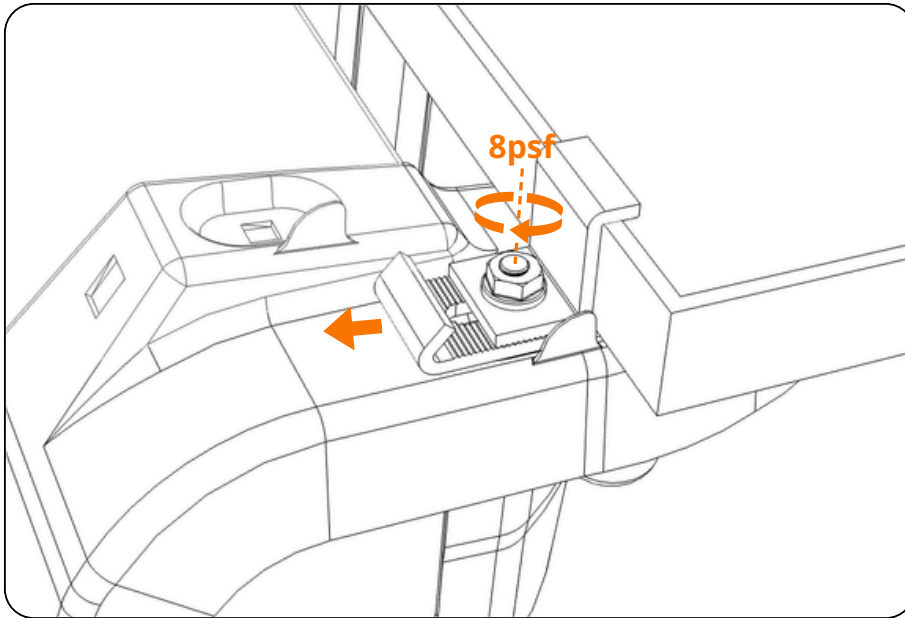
Clamp Attachment (Pictured on 6dg Clamp Location)
